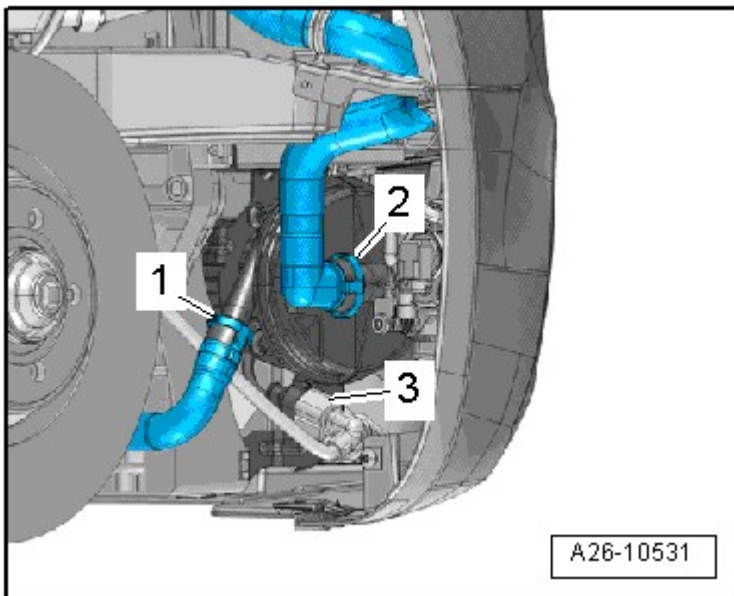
Component Location Of Secondary Air Injection (AIR) Pump Motor -V101-
